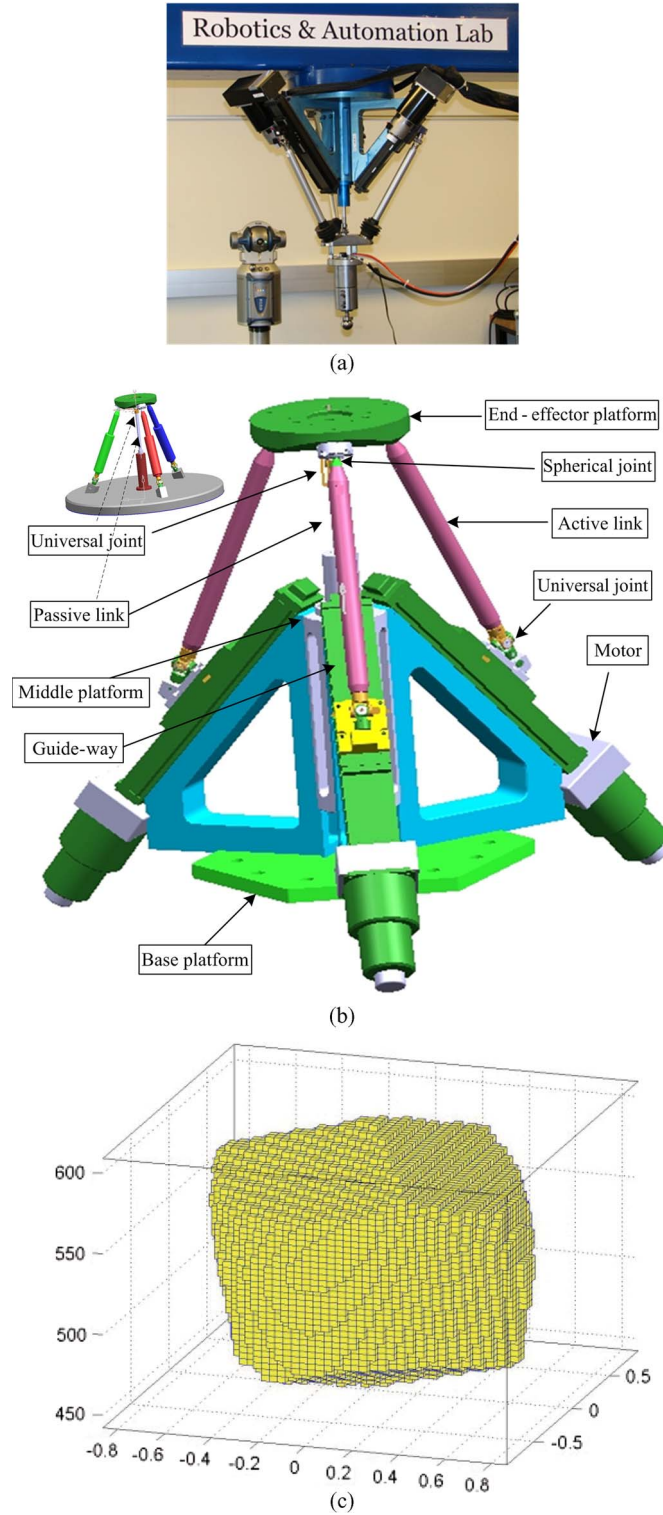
(a) Prototype of the parallel robotic machine tool. (b) CAD modeling. (c) Reachable workspace.
